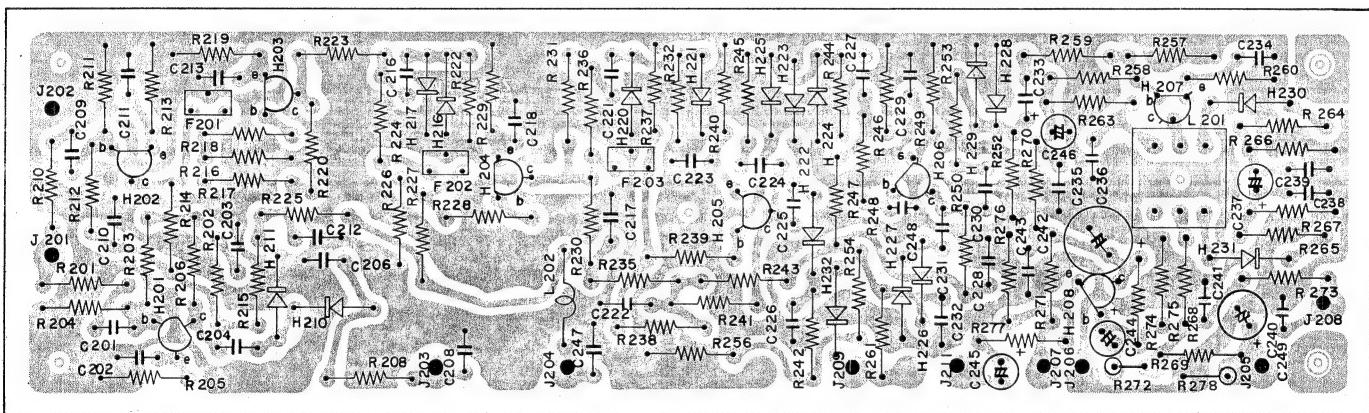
FM IF and Detector Board – P200 Component Assembly Diagram
